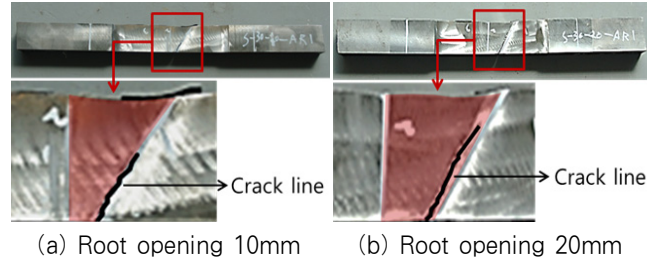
Failure of CJP weld specimens made by using weld rod A - Single bevel 30°
